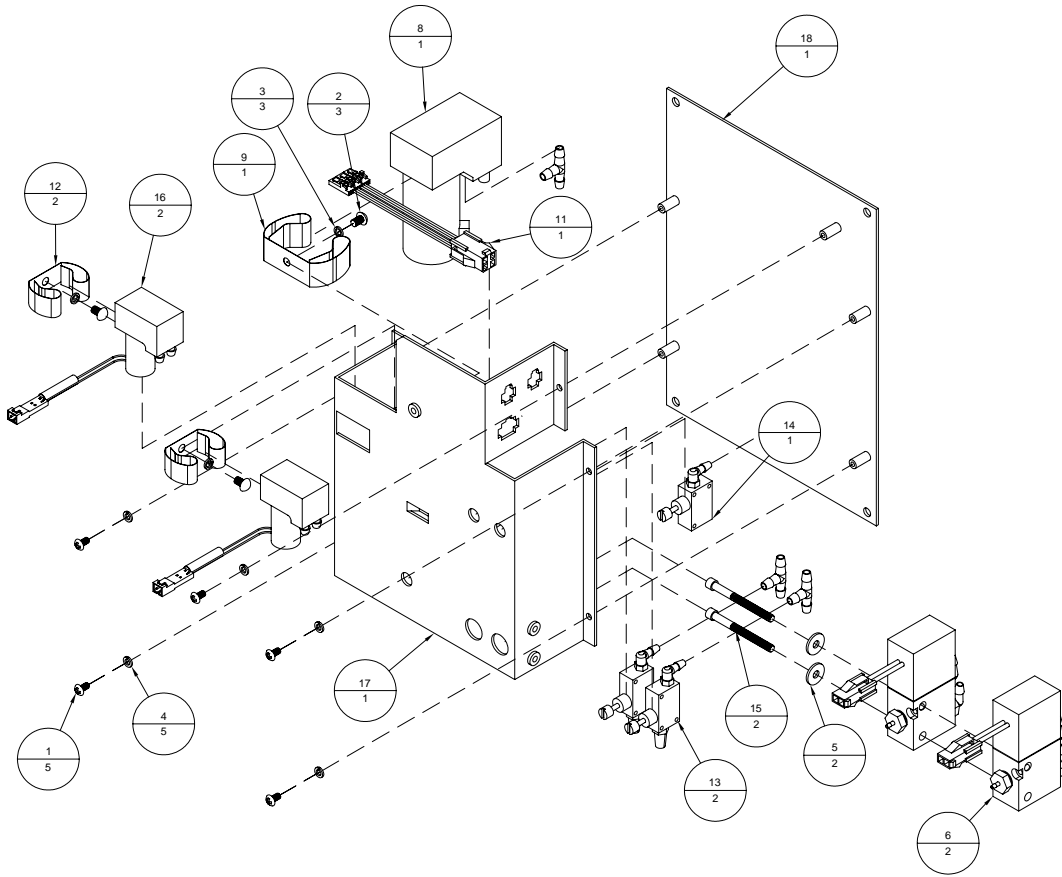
Pressure Regulator 2-Channel (BK-PVM-700)
